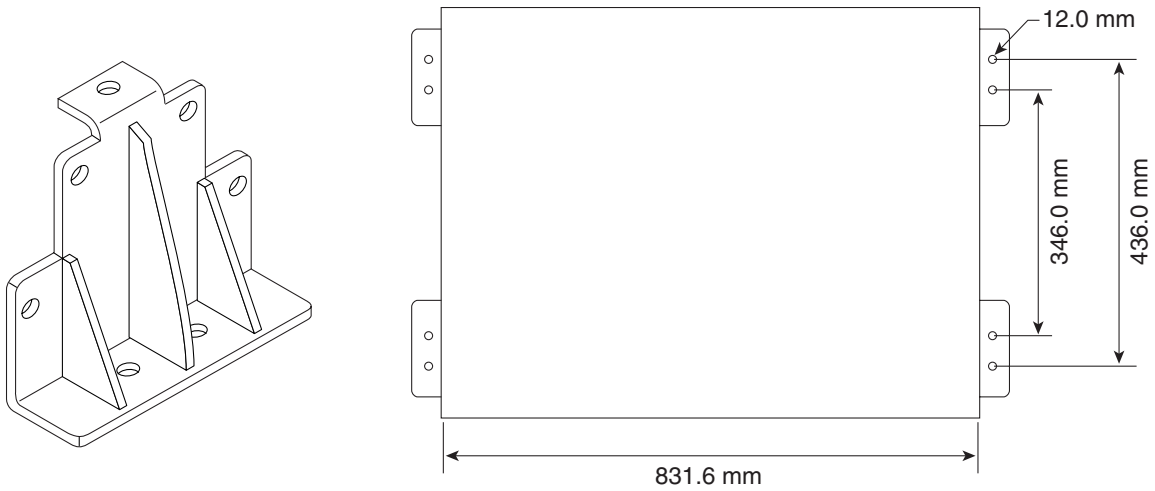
Floor Mounting Bracket for Sun Rack 900-36N
